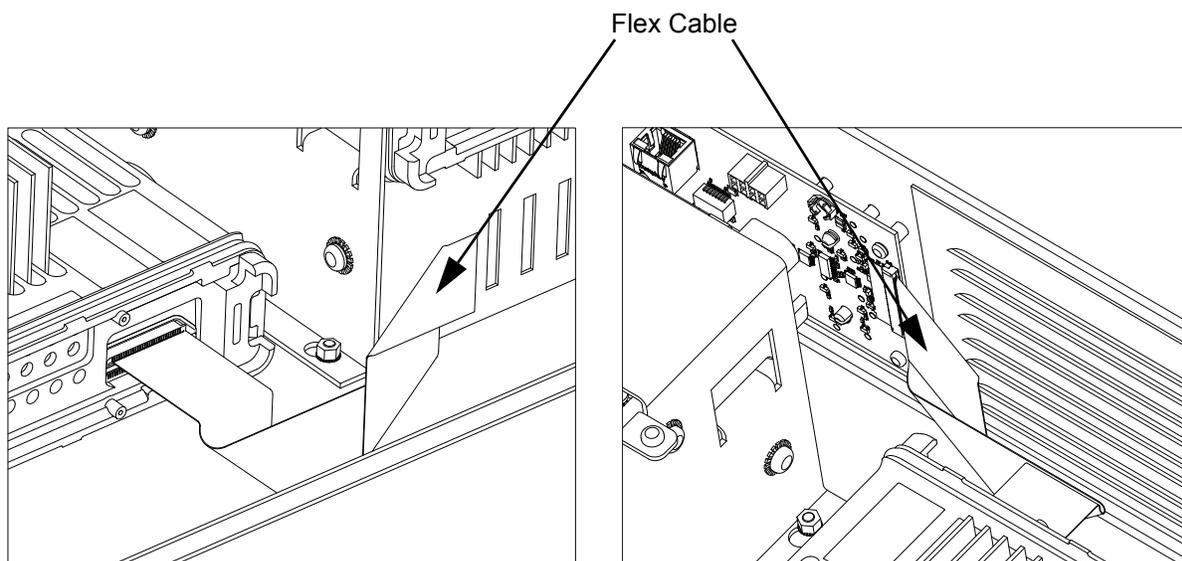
Flex Cable Assembly (VHF/UHF 32 MB Repeaters)
